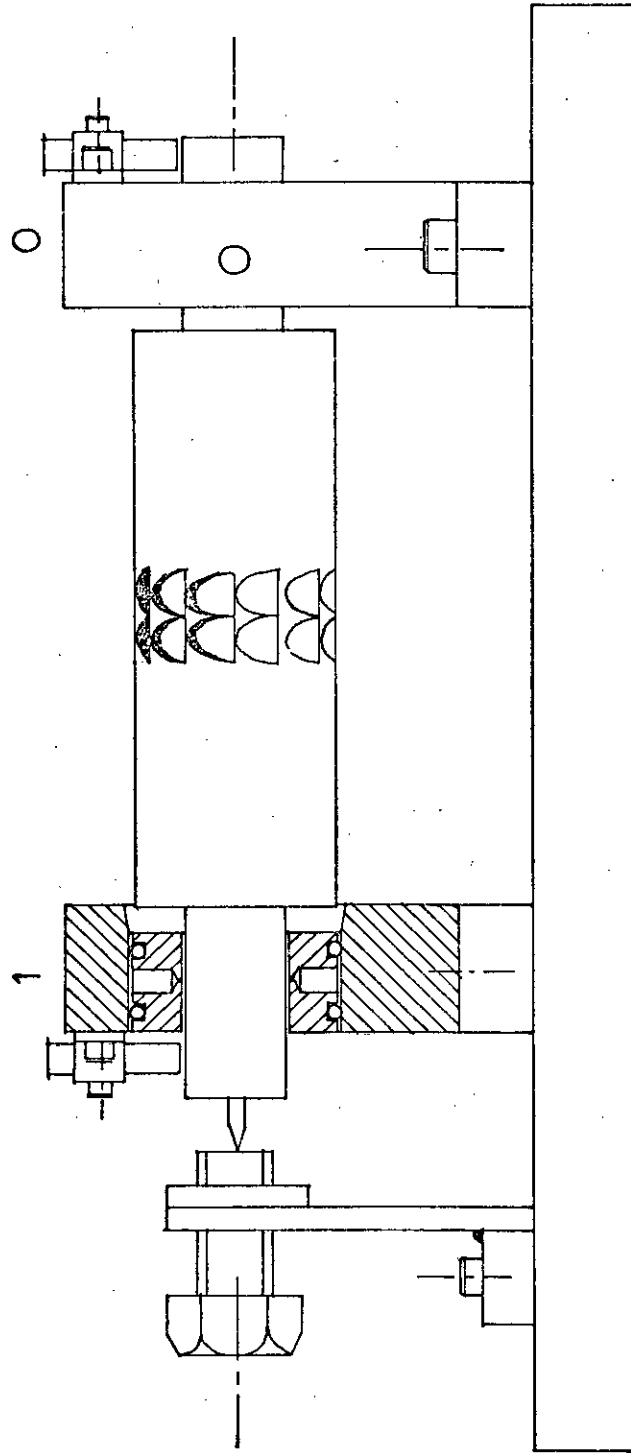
VIEW OF GAS BEARING TEST RIG.
